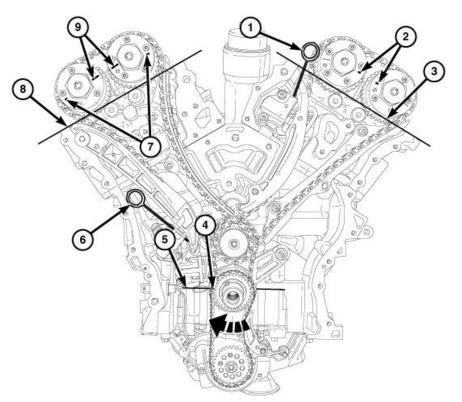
Phaser Timing Marks, Oil Control Valves & RH Camshaft Phaser Lock Courtesy of CHRYSLER GROUP, LLC
